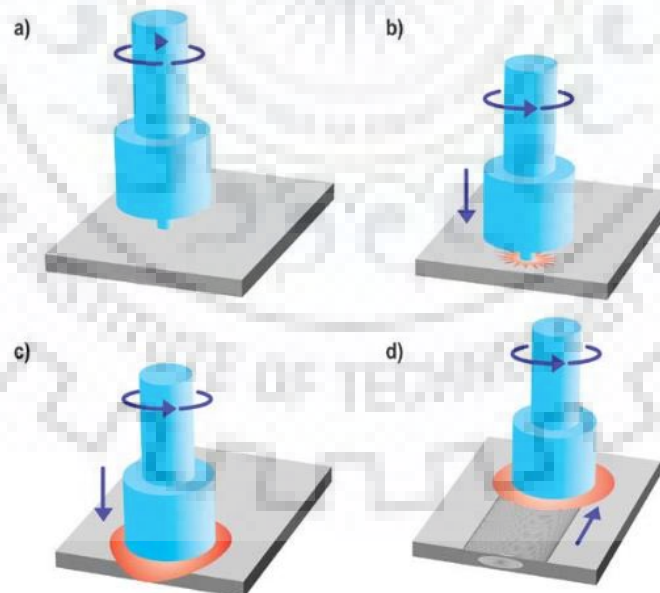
Schematic of friction stir process (a) rotation of tool before contact with the work surface, (b) small diameter pin contact with work surface, (c) shoulder contact with work surface, and (d) tool movement relative to the work surface [9].
